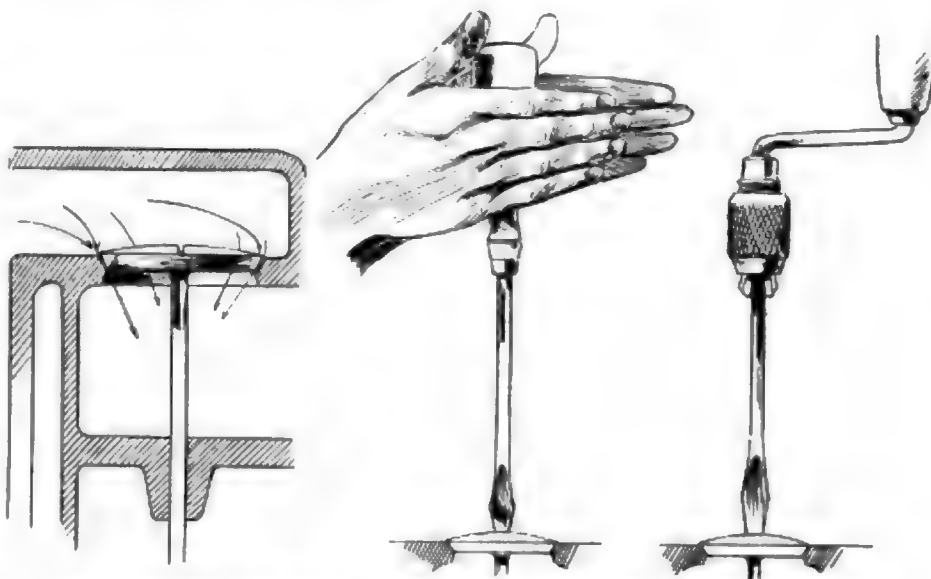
The view at the left is to show how compression leaks through valves which are leaky. The other two views show two tools to use in grinding valves, and incidentally a method of holding the screwdriver in the hands
